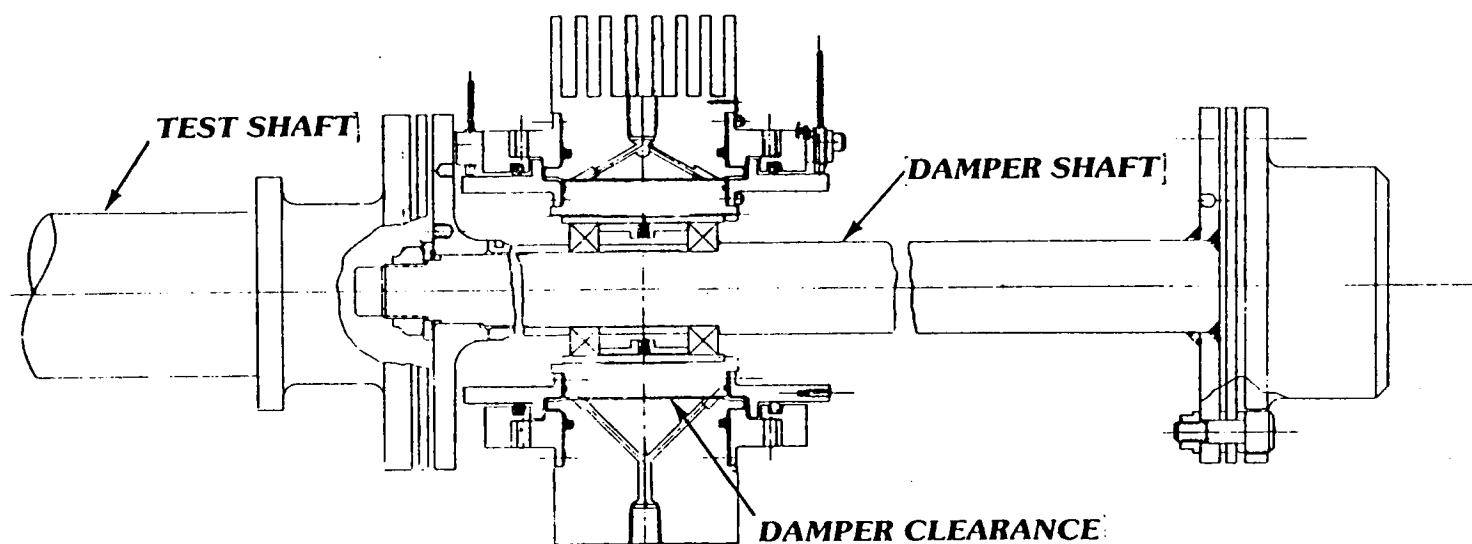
Drive Train Technology Test Rig Configuration for High-Speed Shaft Balancing
